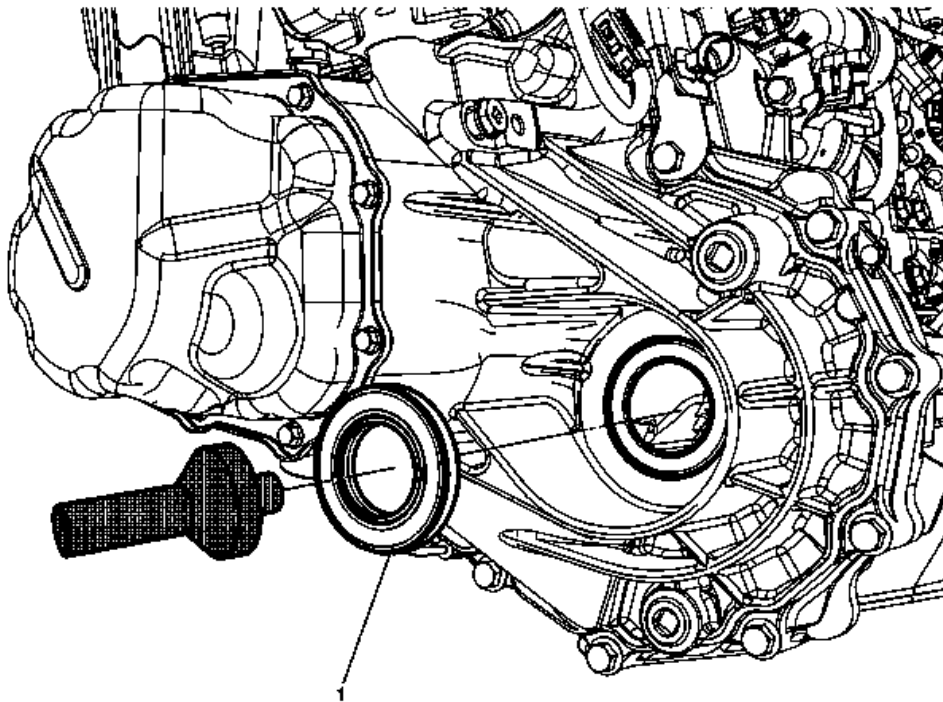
Front Wheel Drive Shaft Seal - Left Side (MX2, MFM)
